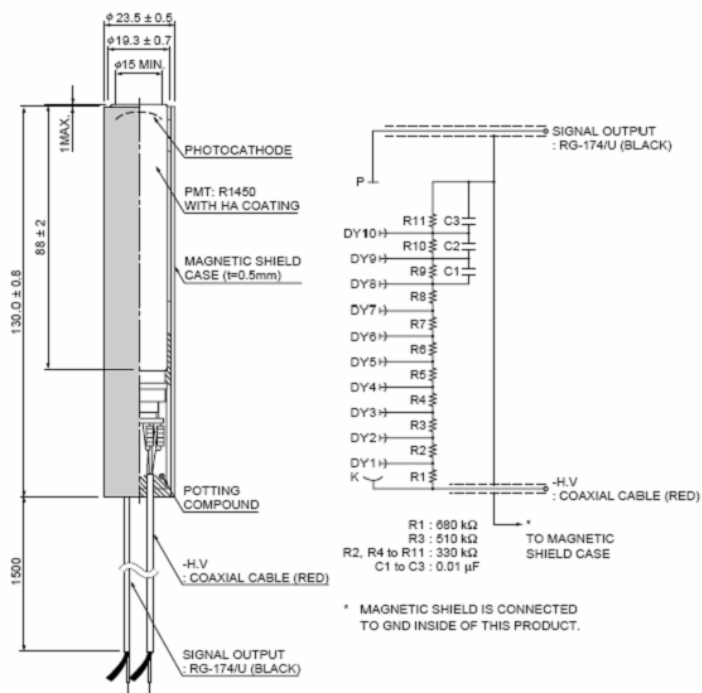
Dimensional Outline and Circuit Diagram of Hybrid Assembly H6524
